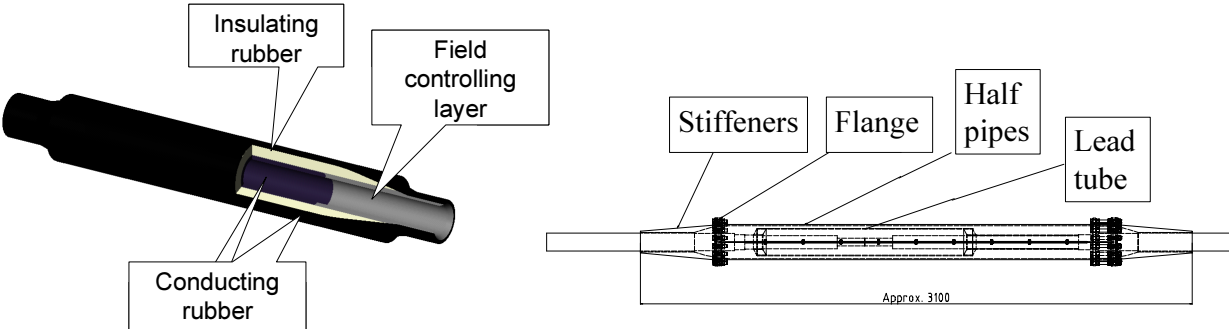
Prefabricated stiff joints. Left: the electrical design, right: the mechanical design.
